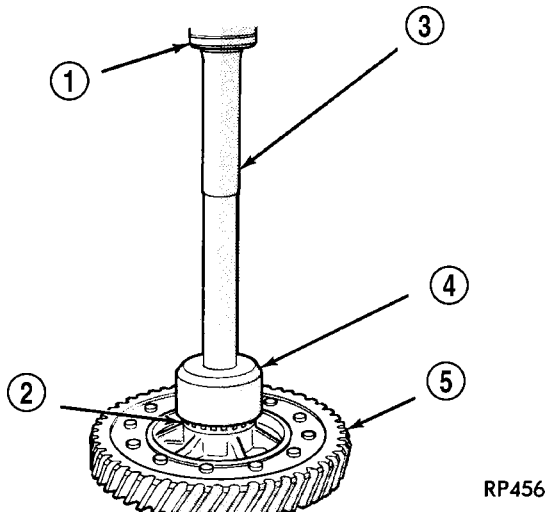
Install Differential Bearing Cone to Ring Gear Side
